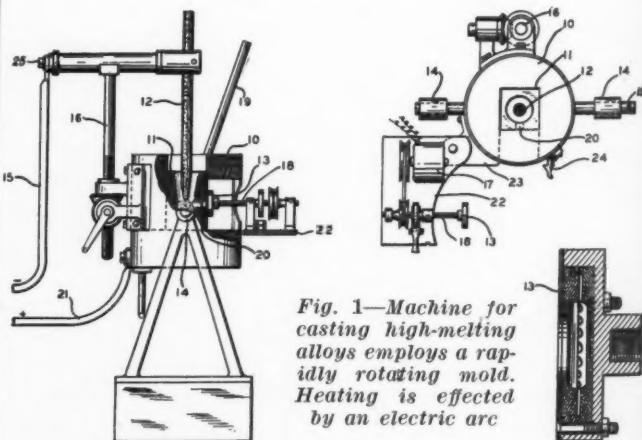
Machine for casting high-melting alloys employs a rapidly rotating mold. Heating is effected by an electric arc
